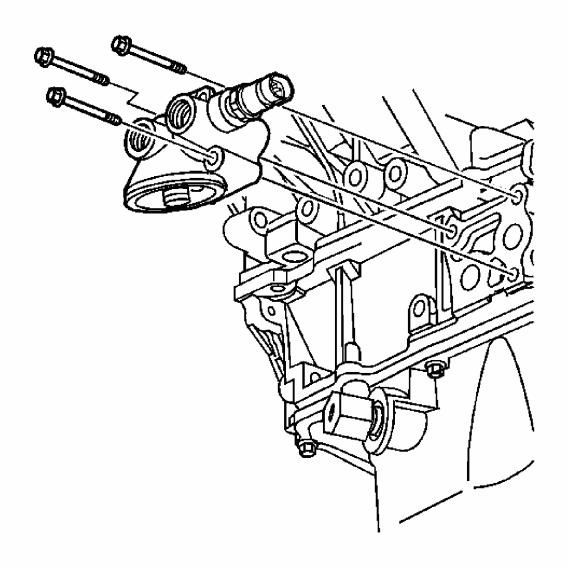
Identifying Oil Filter Adapter Mounting Bolts Courtesy of GENERAL MOTORS CORP.
